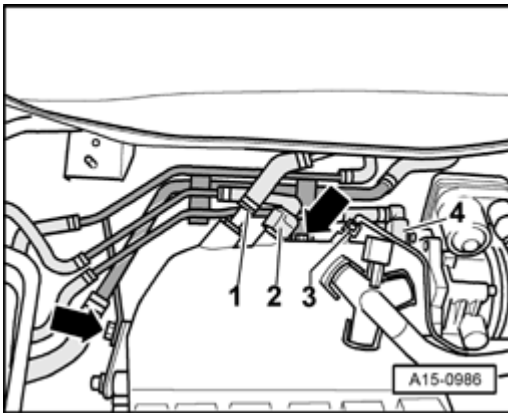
Disconnecting Vacuum Hoses At Rear Of Intake Manifold
